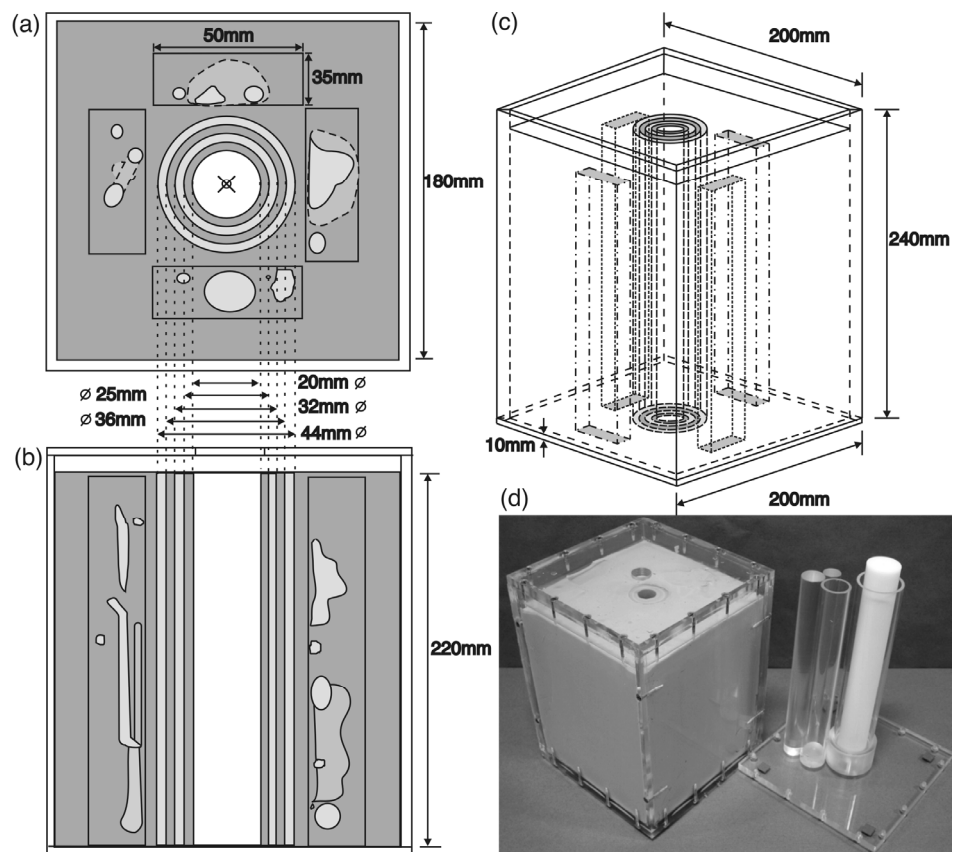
Example engineering drawing of the construction of the phantom and picture of the manufactured phantom and mould. (a) Transverse view of the phantom, (b) example view of the coronal view through the phantom, (c) 3D engineering view of the construction of the phantom, & (d) picture of the constructed phantom and mould
